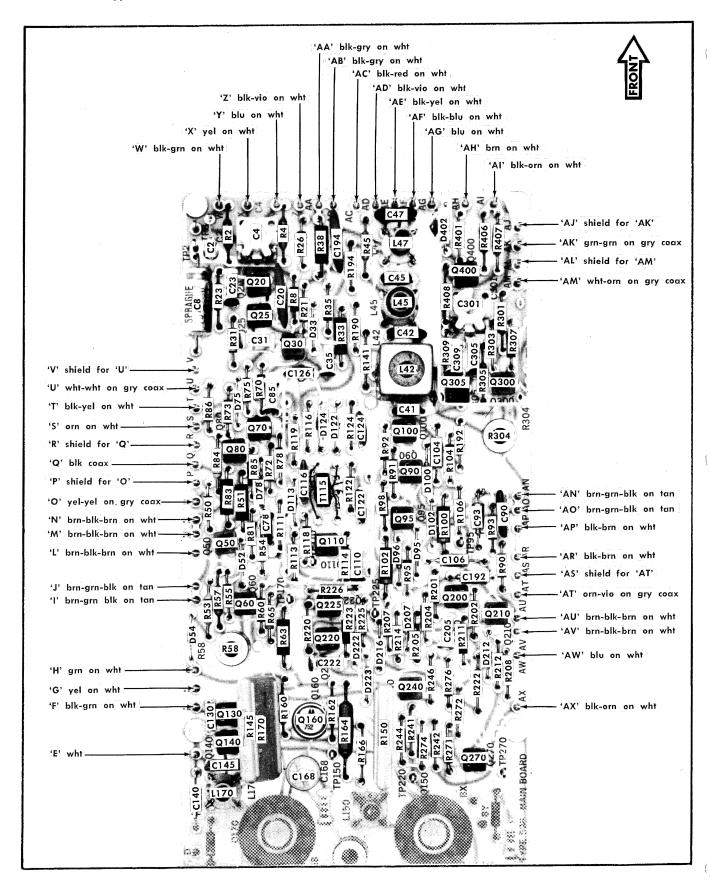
A. Partial top view of Main board showing components and wire color codes for instruments SN B080560-B099999.
